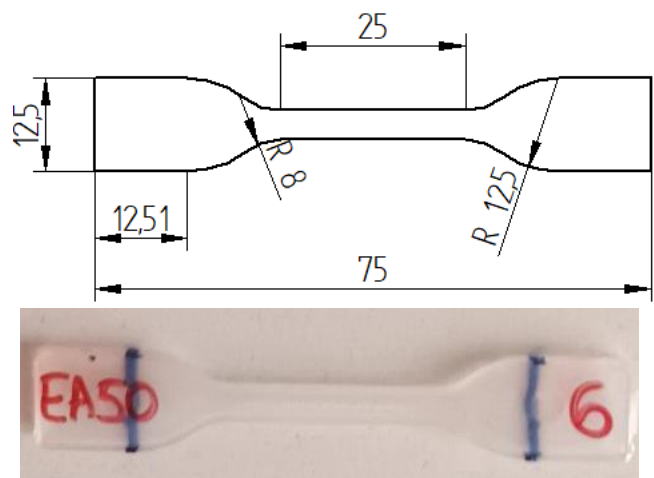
Test specimen according to ISO 527/2-5A standard [11] and injection molded specimen
